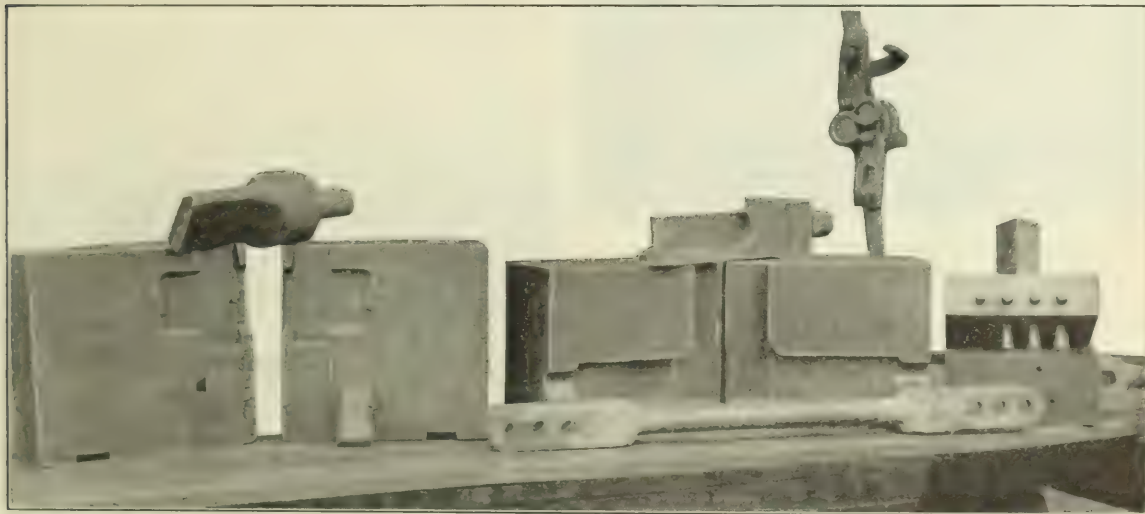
Dies for Forming Spring Hanger Gibs, Welding Bottom Brake Rods, and Punching Them, and a Device for Bending S-Hooks.
